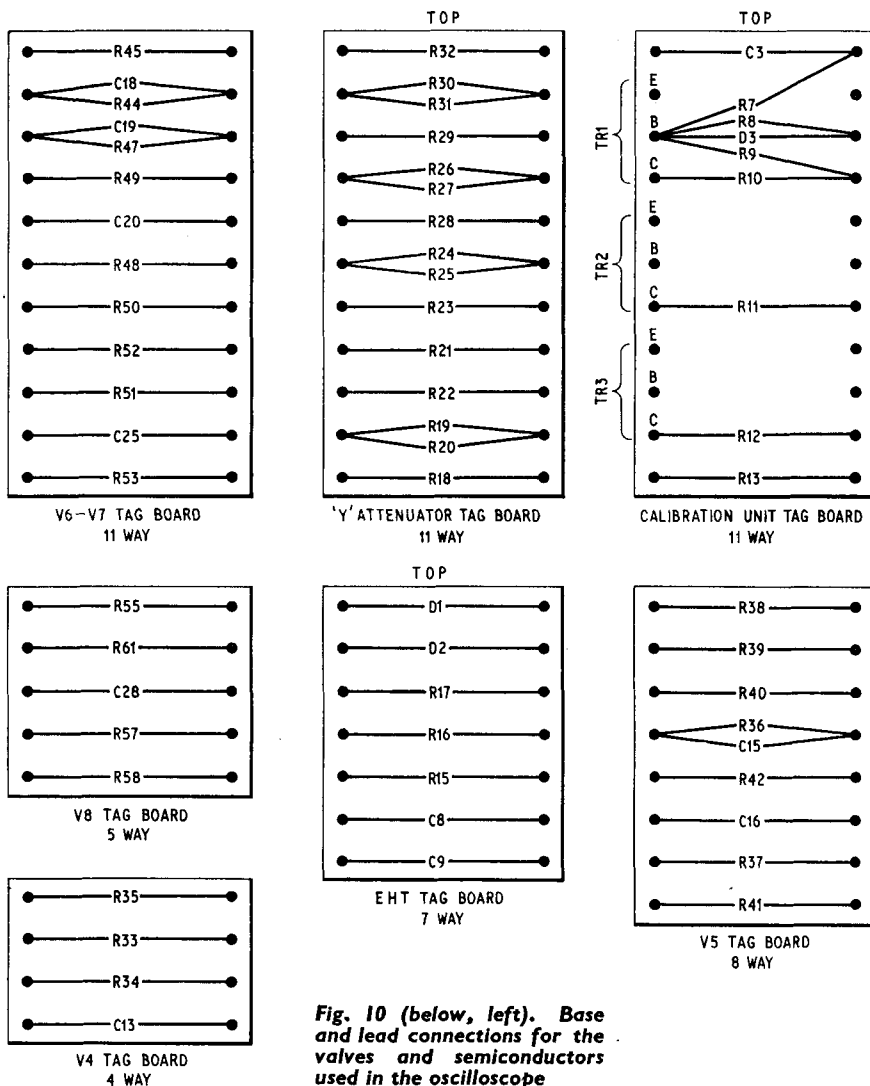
Suggested arrangement of components on the various tag boards. Components should be assembled and wired up on these boards prior to the latter being fitted in position on the chassis
